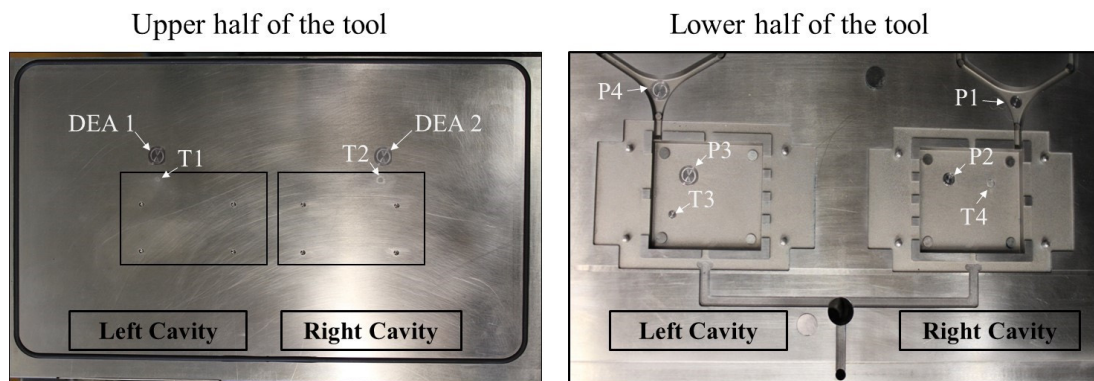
Mounted sensors to the upper half of the tool (left) and to lower half of the tool (right)
